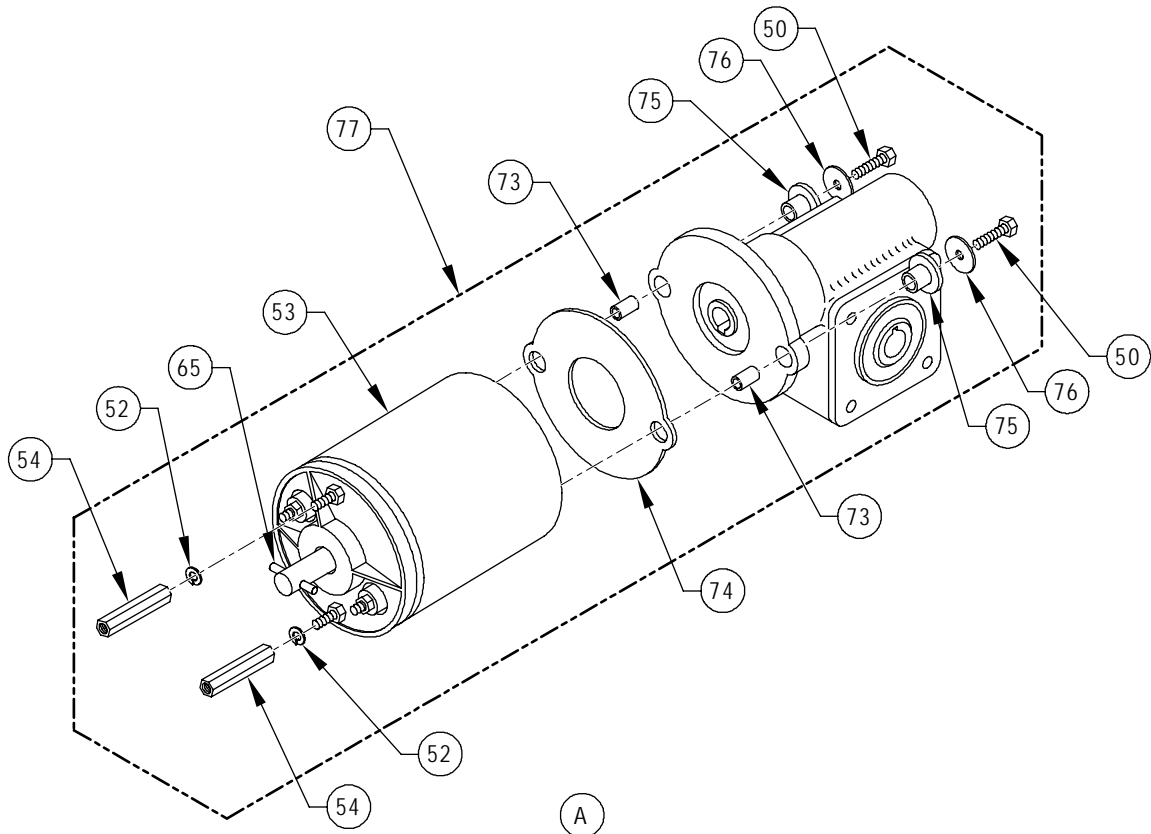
UNI-LITE BASE ASSEMBLY (SHEET 2 OF 2)
